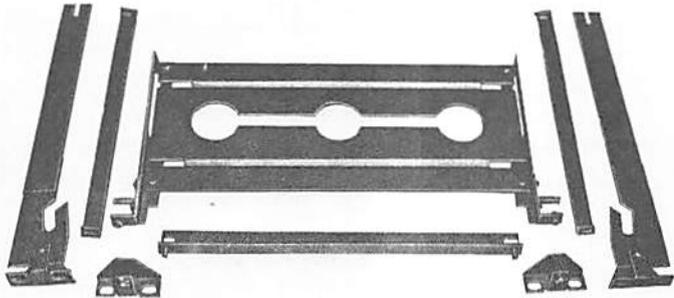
Shutter mechanism M-36 (Ref. 38)
